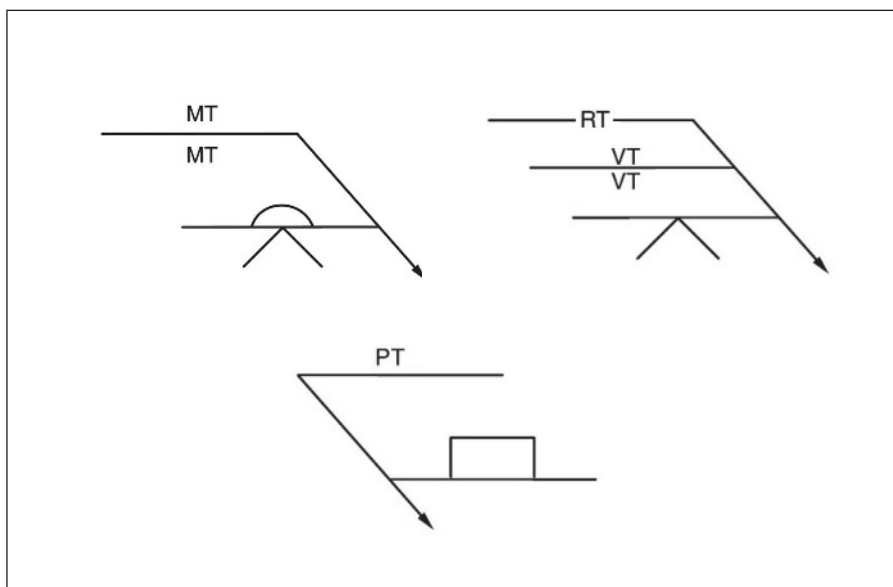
Welding and nondestructive examination symbols.
